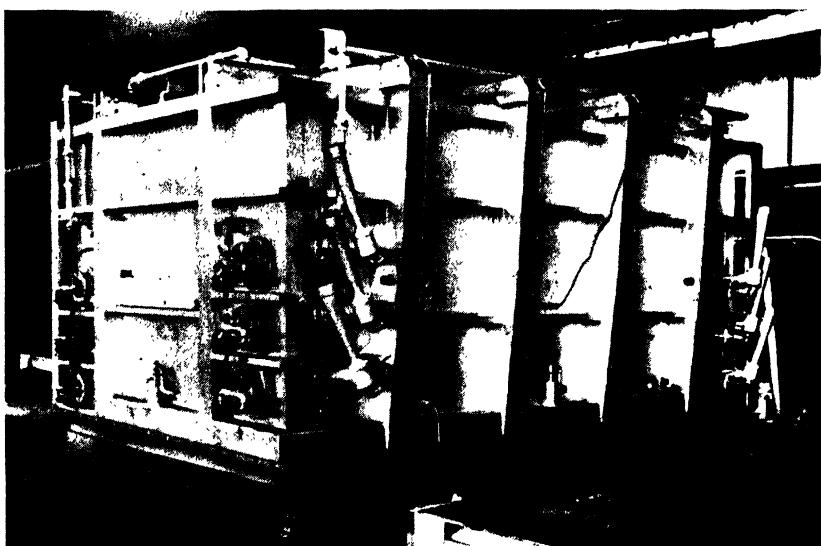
Radiant-tube box annealer. (Courtesy Surface Combustion Co.)
